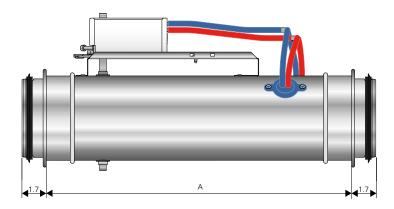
Dimensions with DUCT ADAPTER installed, REACT V SKNX circular.
